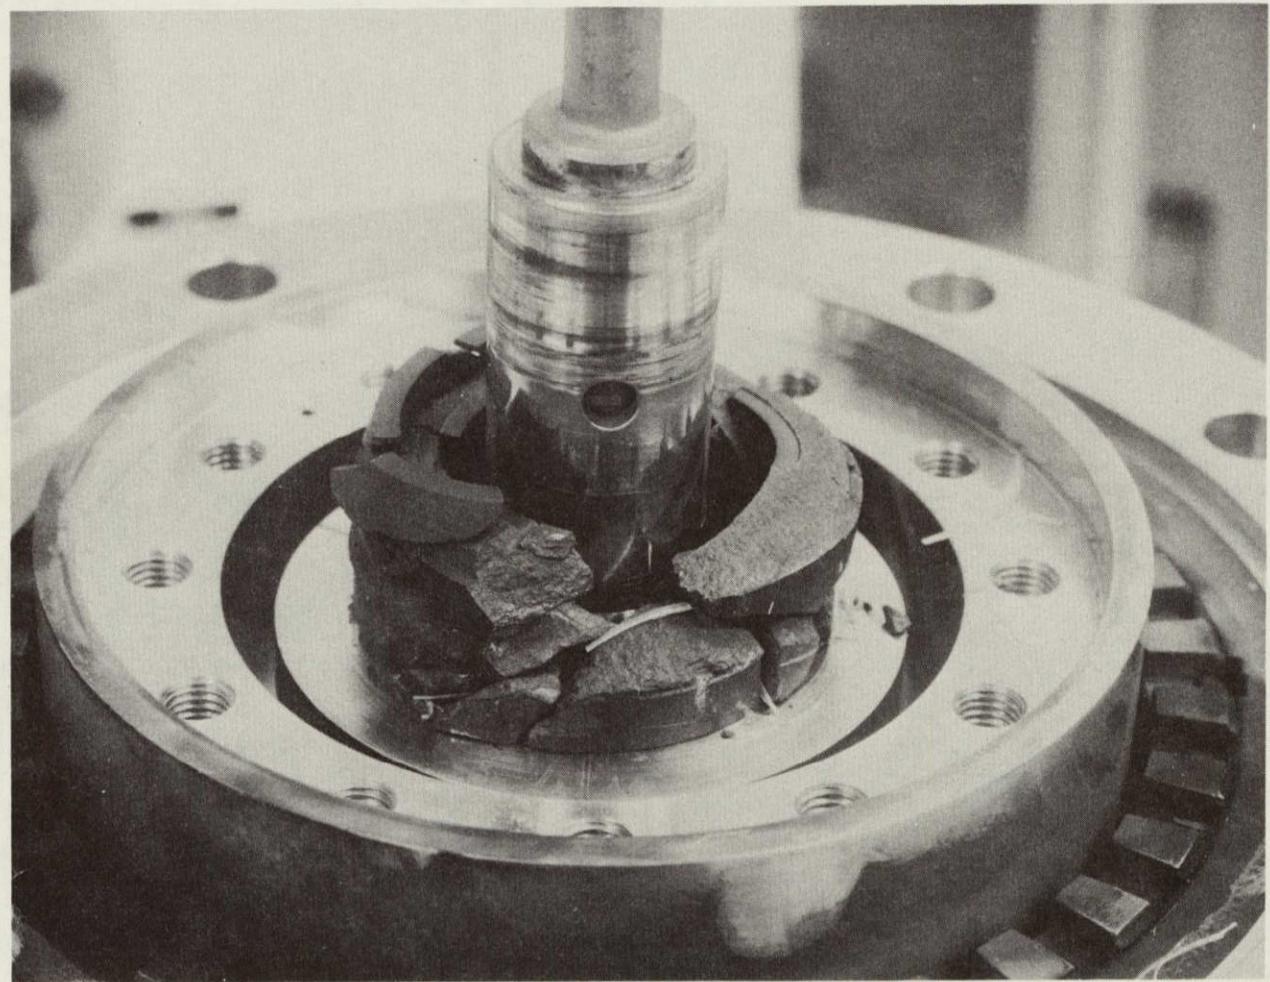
Shattered Spiral Groove LOX Seal Following Bearing Failure (Build 8, Posttest 332)
